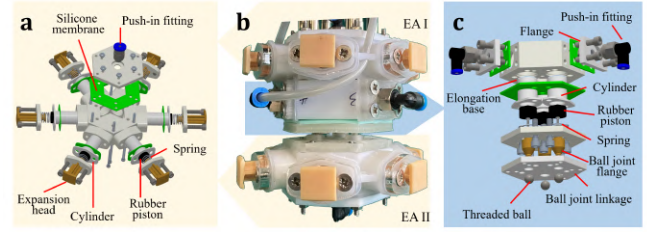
Hydraulic actuation system. (a) Design of the radial expansion actuator (EA). (b) The assembled prototype. (c) Design of the axial elongation actuator.
